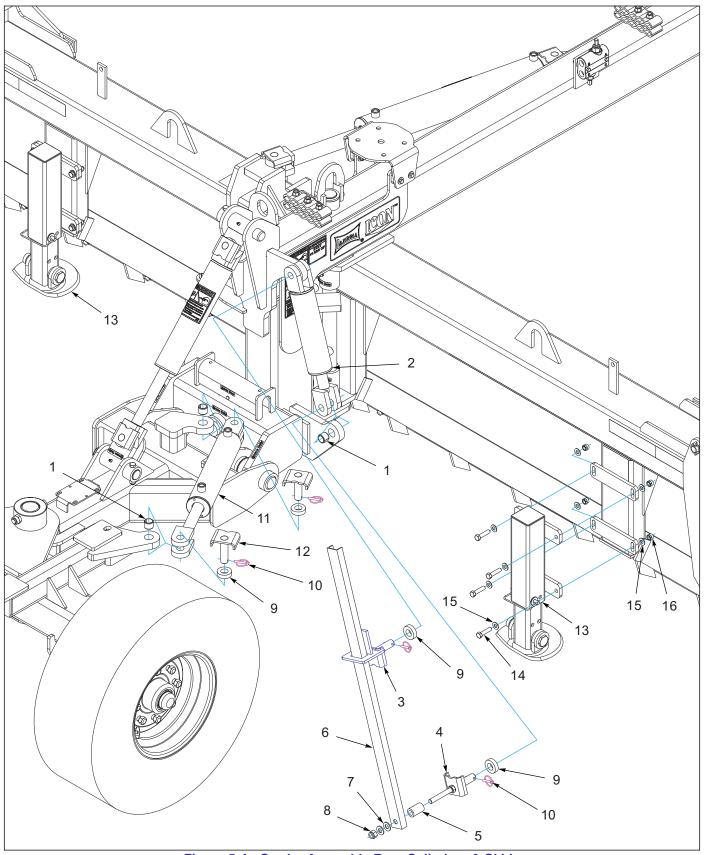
Grader Assembly Rear Cylinders & Skids
